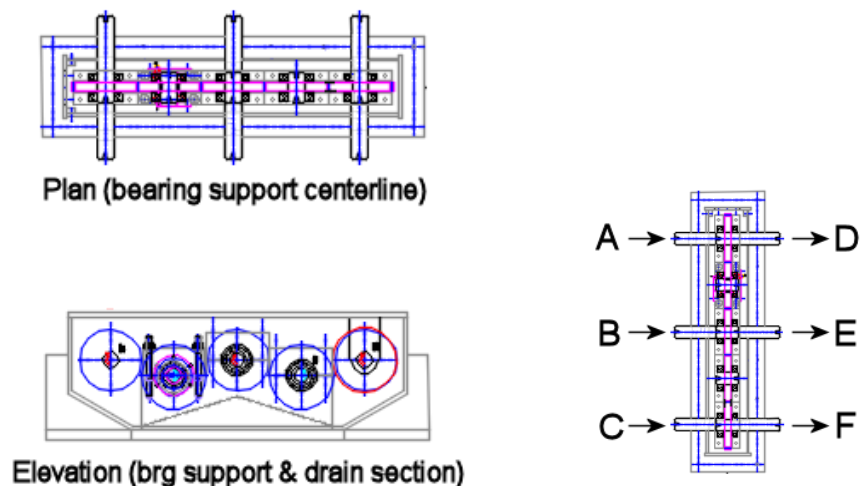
Universal combining gearbox—elevation and plan views and power in/out.
